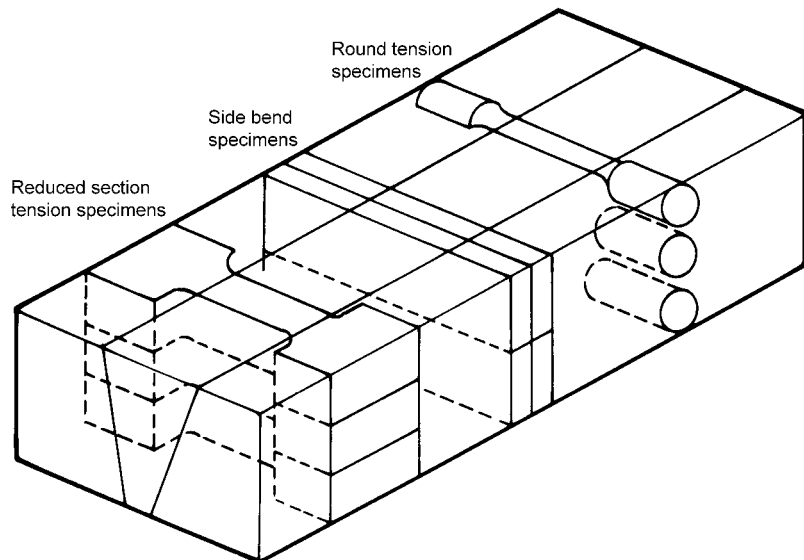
Removal of multiple bends and tension specimens from thick test plates
